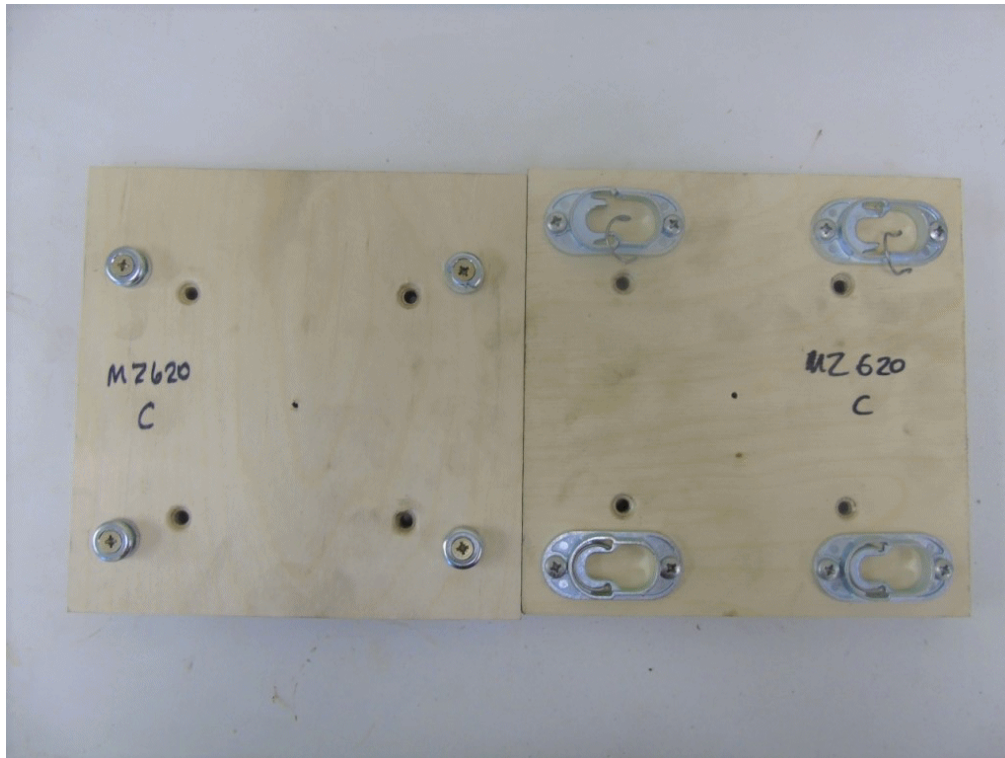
A view showing the general condition of the button after a pull apart test on a type 1 - metal fixing.
